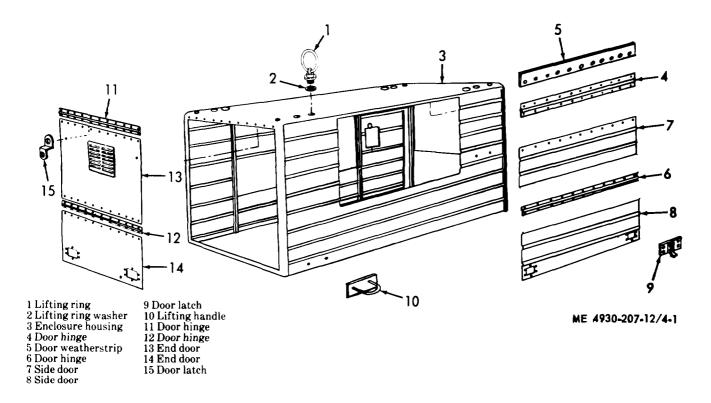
Enclosure assembly, disassembly and reassembly.
